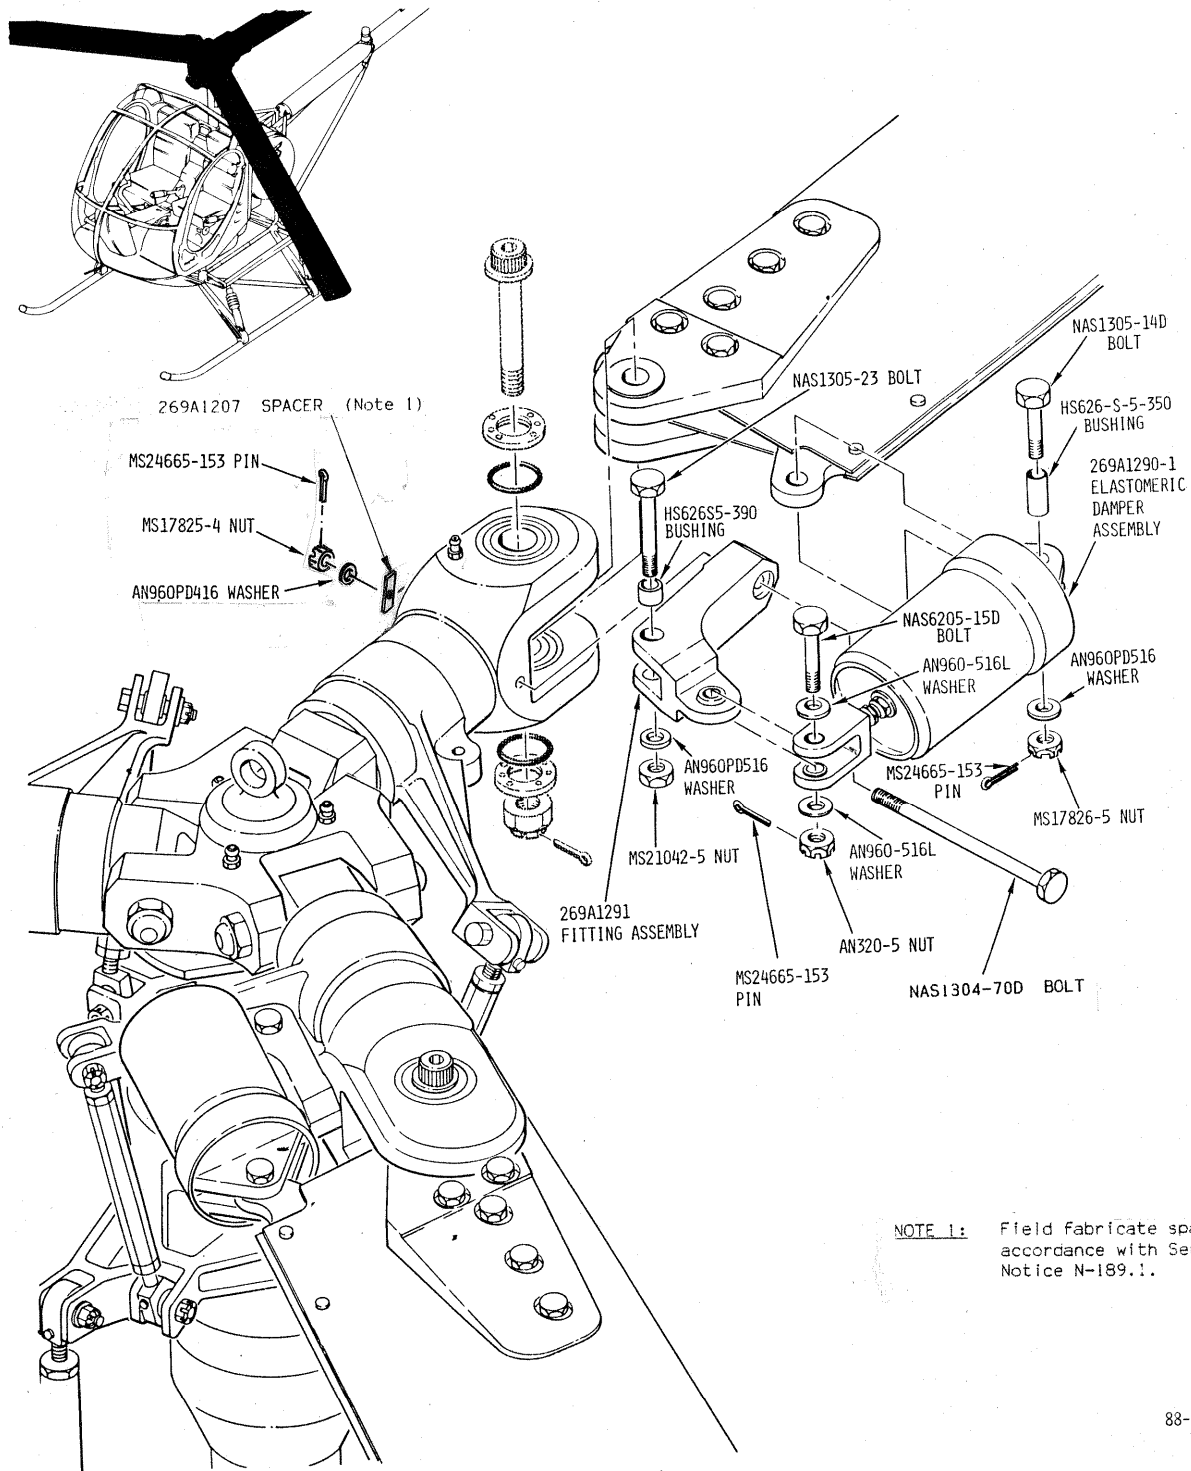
Installation of 269A1290-1 Main Rotor Damper Assembly
